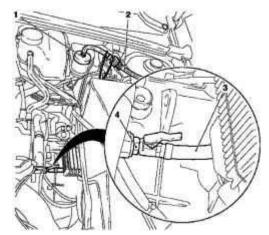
The flow of hydraulic clutch: 1 - Adapter 2 - a special tool MKM-6174-2, 3 - a special tool MKM-6174-1, 4 - valve pumping
